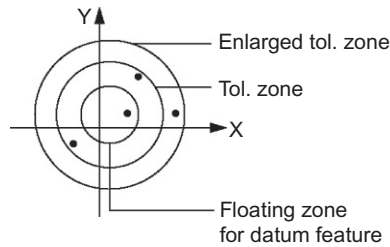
Position deviations and tolerance template for a workpiece according to Fig. 13.80; the point is to be accepted
